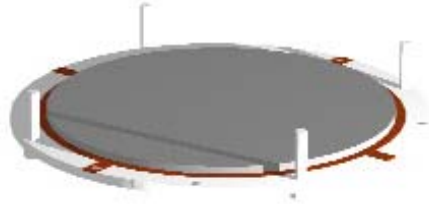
Assembly of MCP-stack - Stage 2a (DLD40, DLD80 & HEX80)
